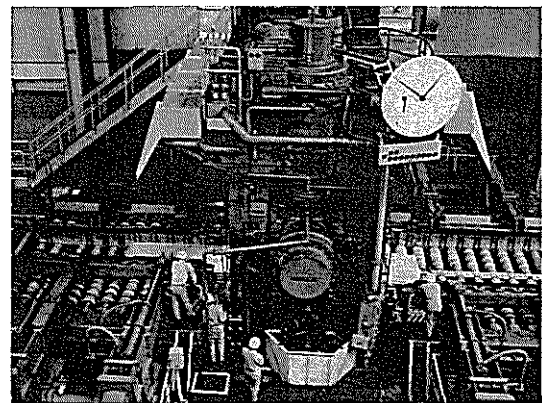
Single stand hot roughing reversible mill, R100 (1966)³⁾
